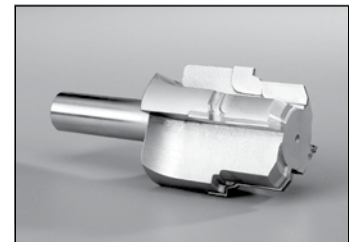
ISO 6149-1 Straight Thread Port Counterboring Tool with ID Groove
